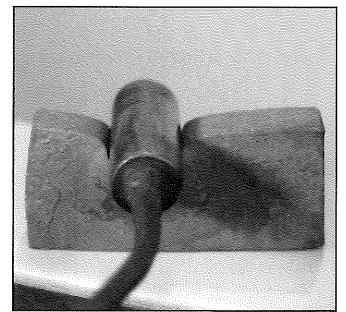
A 1-inch fuller was driven into the bar at one side of the half-way mark
